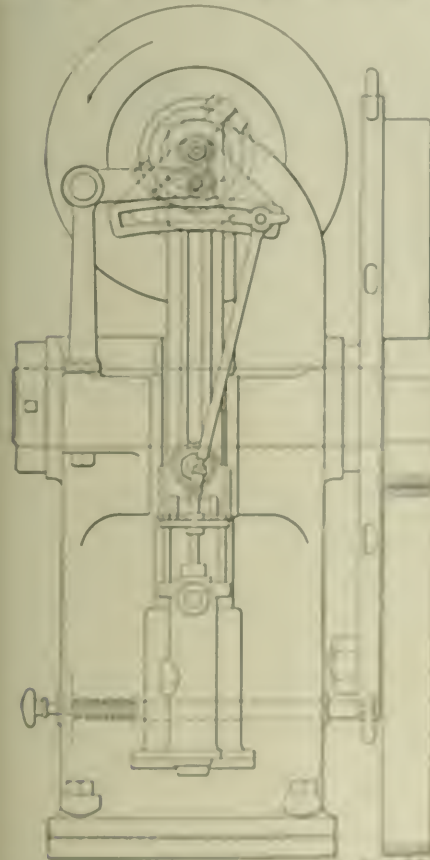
FINK GEAR ON REVERSIBLE HERRING ENGINE
